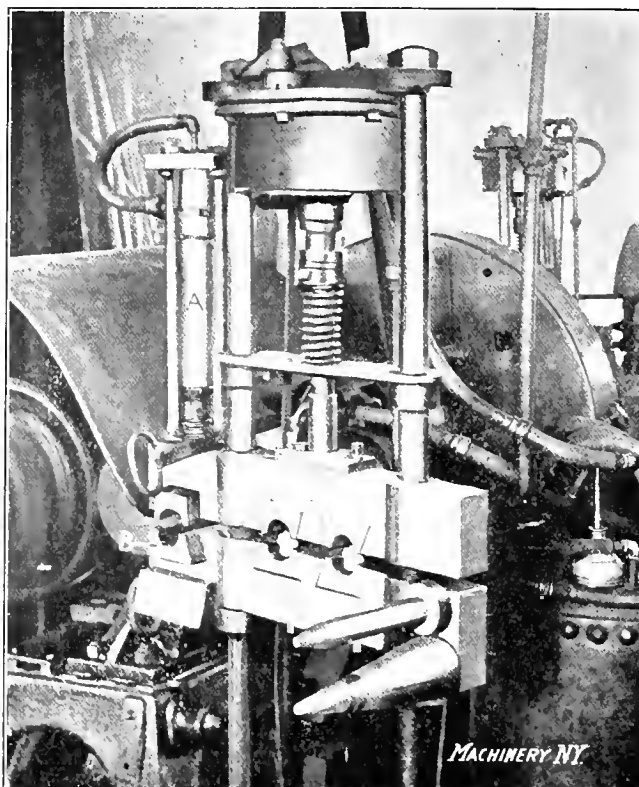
Pneumatic Flue-swage and Welding Die
